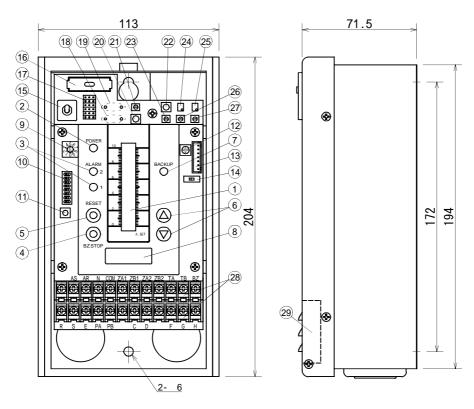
Dimensions of the Indicator and Alarm Unit (without a backup power source)
